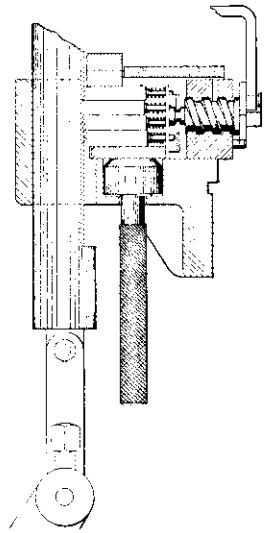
View of the control rod locking mechanism in locked position, with extra pressure being applied.
